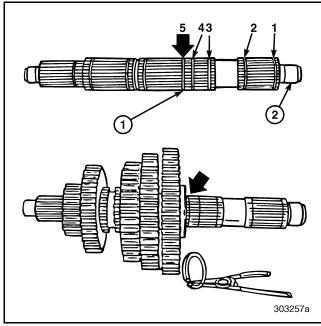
Removing Reverse Gear Snap Ring (T313L/T318L Shown)
